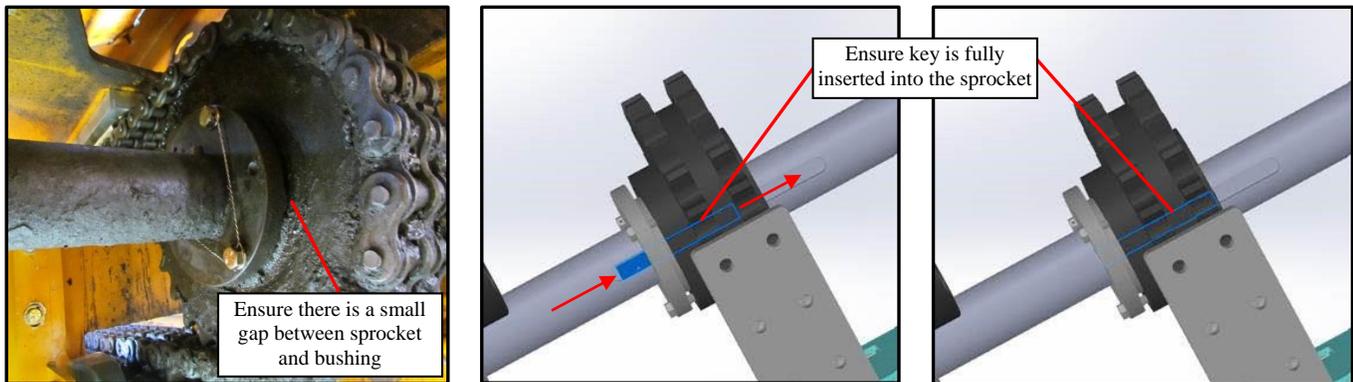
Sprocket assembly properly assembled, torqued and safety-wired, with key fully inserted into sprocket
